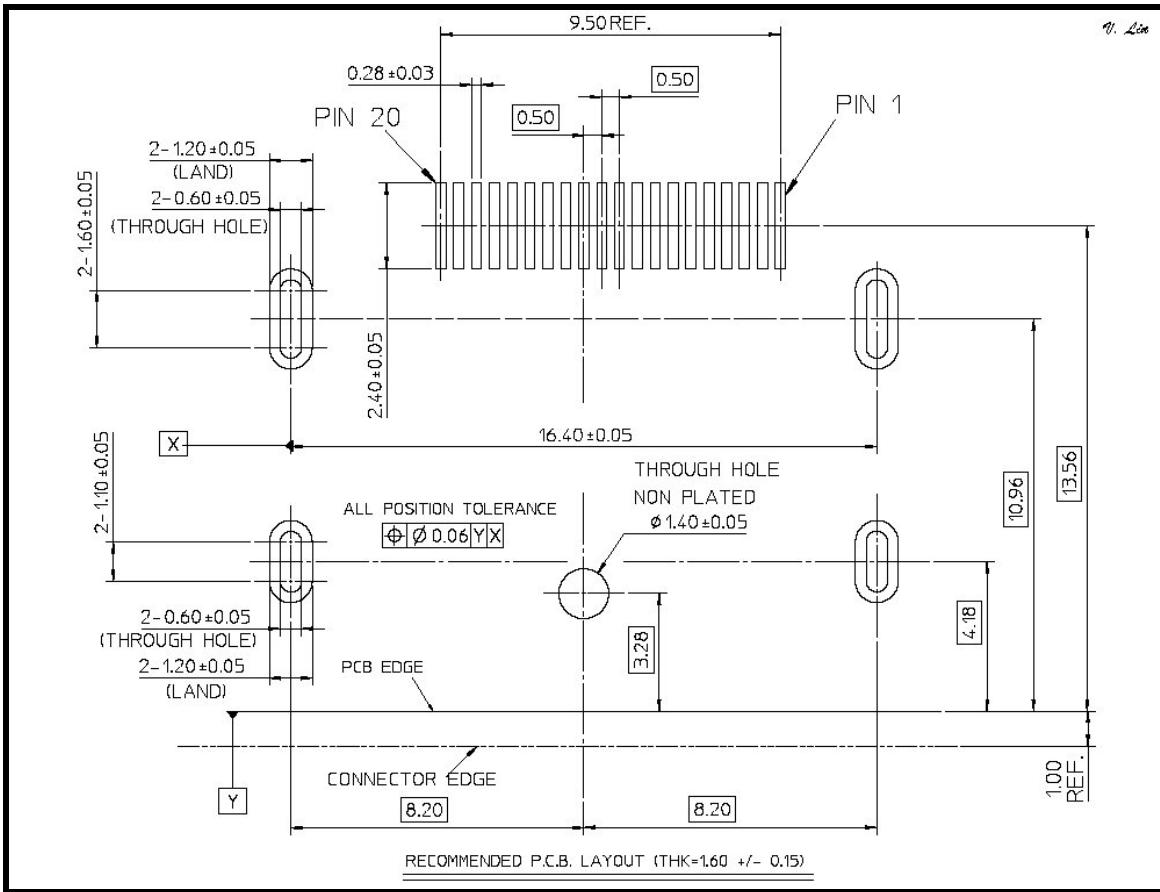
Recommended PCB Layout for DisplayPort External Connector
